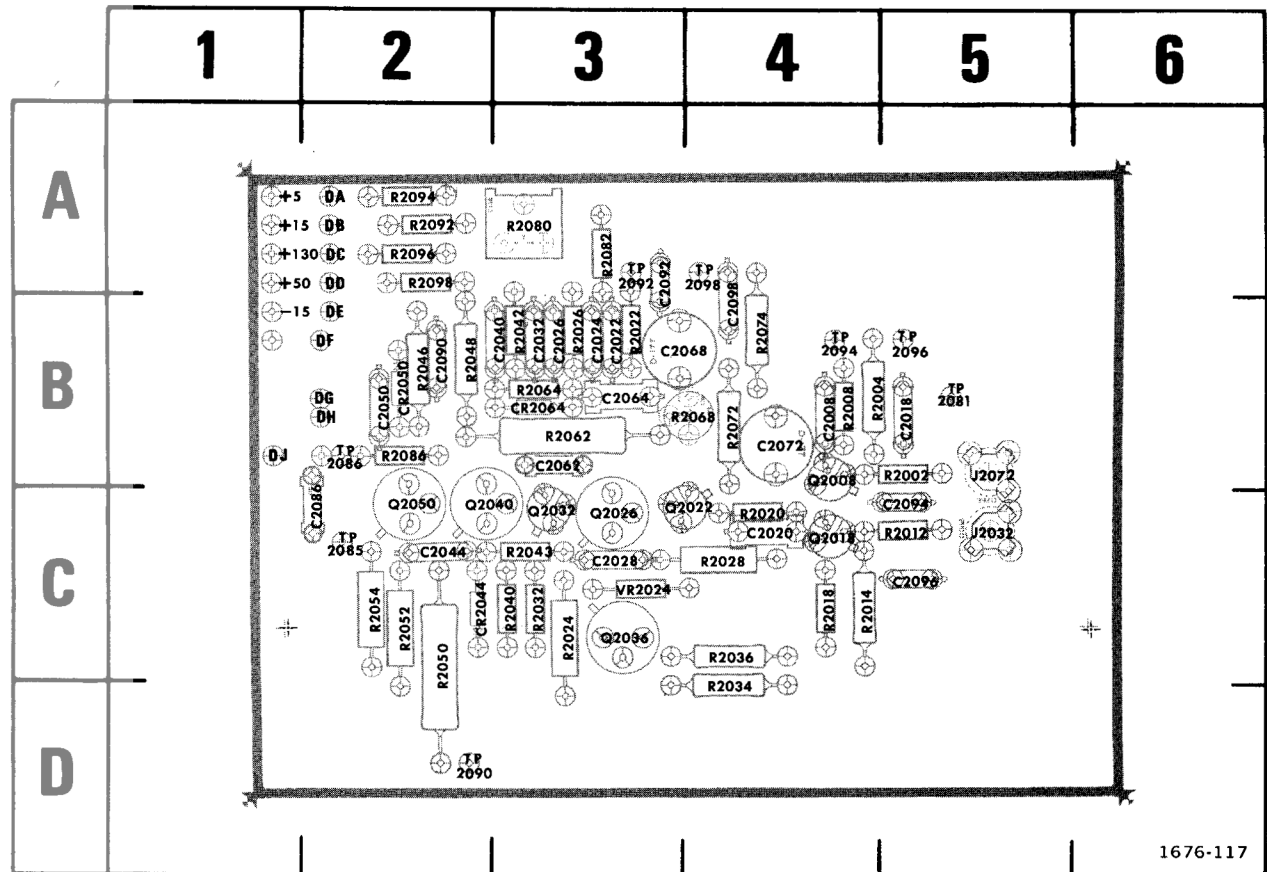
A22—Z-Axis circuit board assembly (Beam 2).
